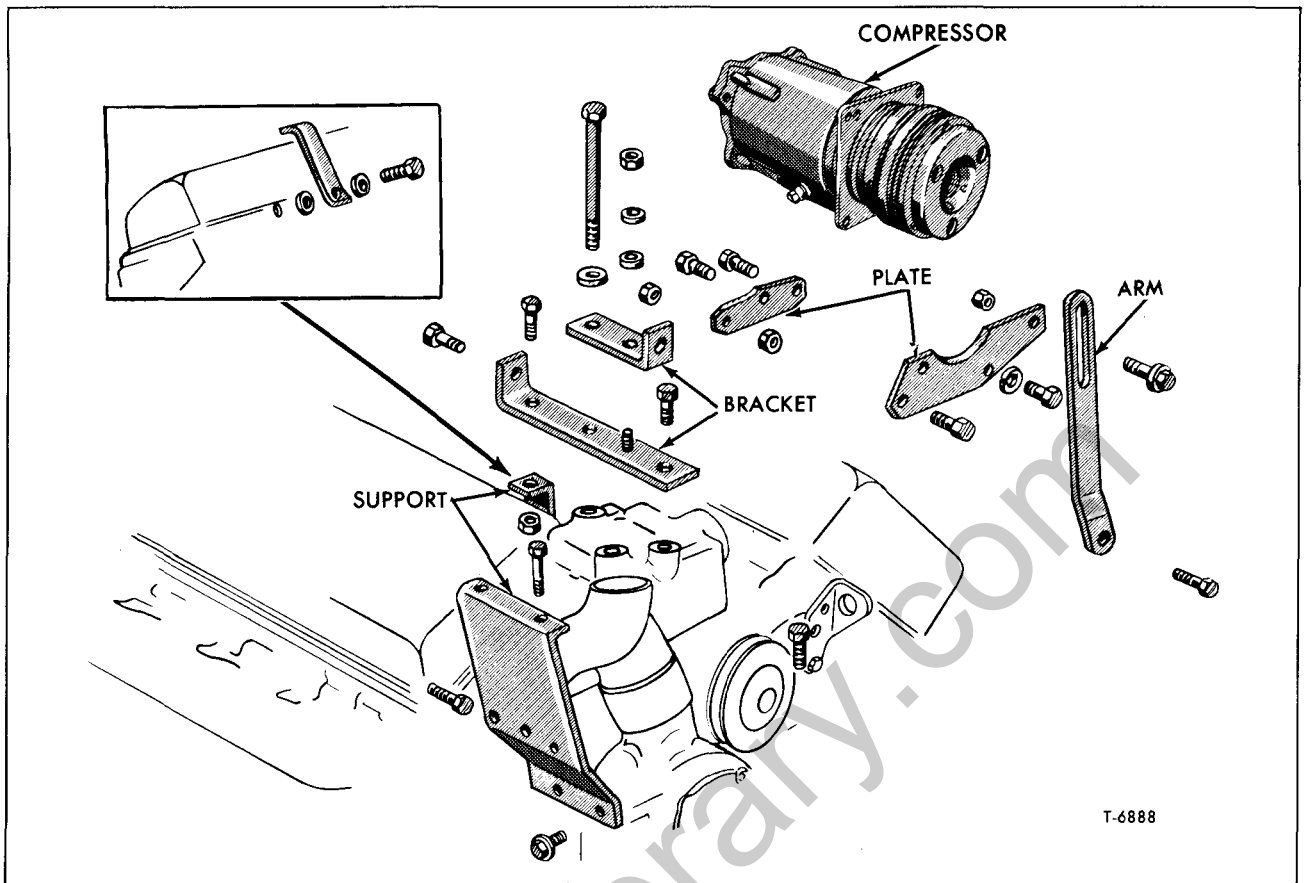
Compressor Mounting (V8 Conv. Cab Model)
